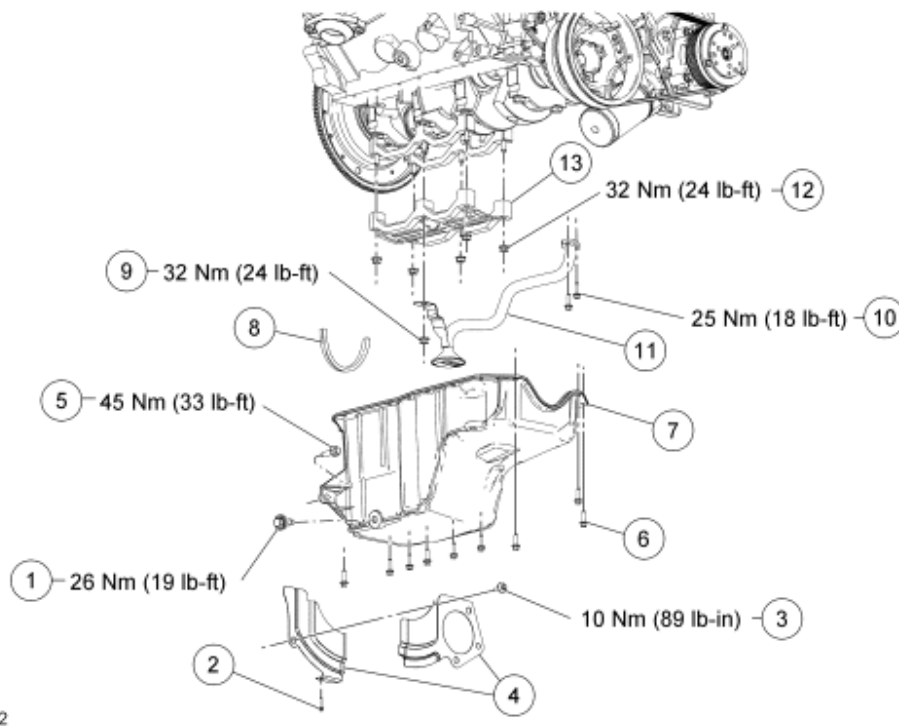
Exploded View Of Engine Lubrication Components (With Torque Specifications)
